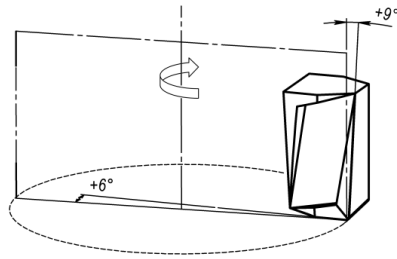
Fixation and orientation of the insert on double positive milling tool (axial rake angle of 9° and radial rake angle of 6°).
